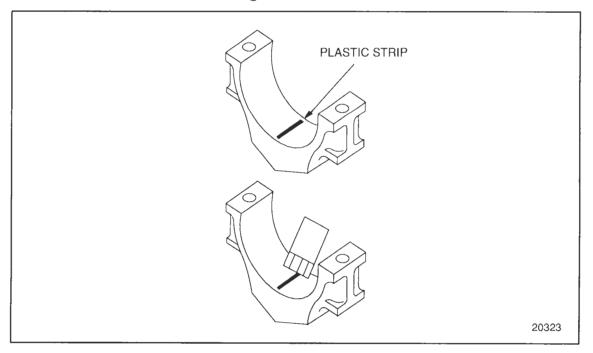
Using Plastic Strip to Measure Bearing-to-Crankshaft Clearance
